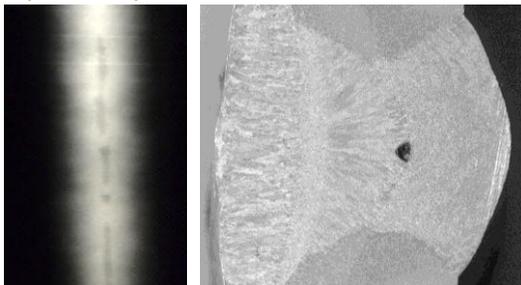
Welding Imperfection Radiography parameters of ST005, 170mm to 335mm; Macrograph of ST005 weld bead showing a slag channel
